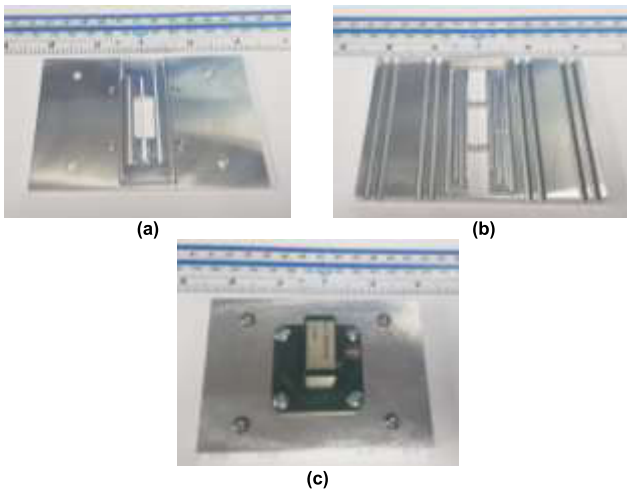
The prototype of Aluminium X-band antenna. (a) Top view of first layer, (b) top view of the second layer and (c) bottom view of the assembled antenna with WR90 coaxial to waveguide adapter.
